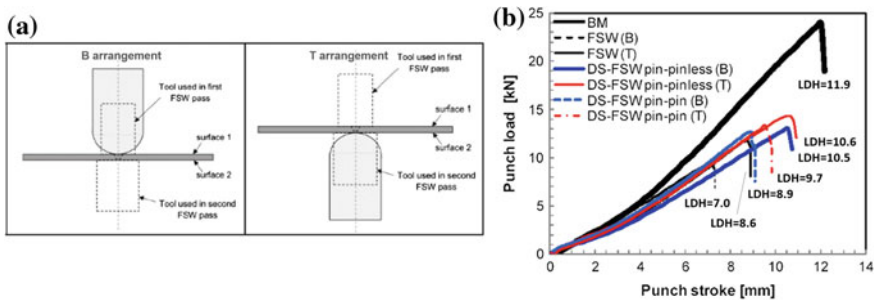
Hemispherical punch test configurations: in the B arrangement, surface 1 is in contact with the punch, in the T arrangement surface 1 is opposite, (a); related test for different experimental conditions (LDH is the Limit Draw Height), (b)
